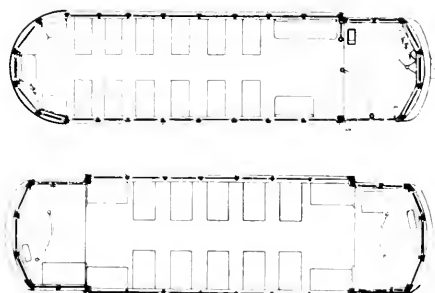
PLAN VIEWS OF ONE-MAN, LIGHT-WEIGHT CARS
